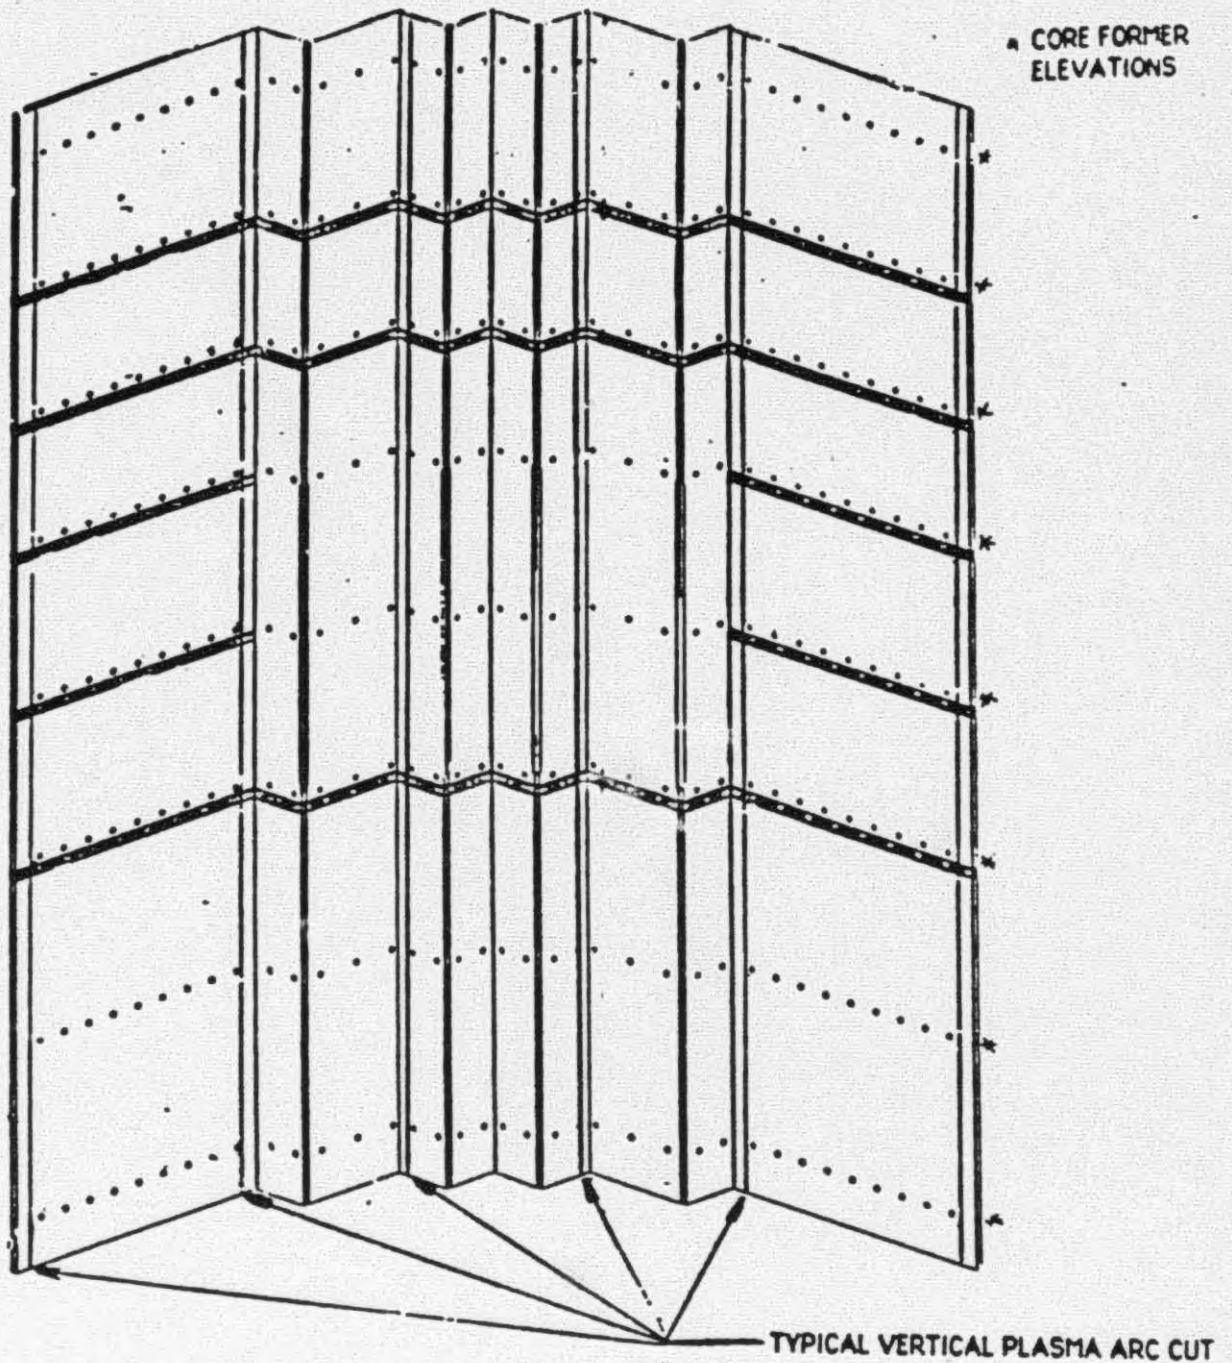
BAFFLE PLATE ACCESS OPENINGS
